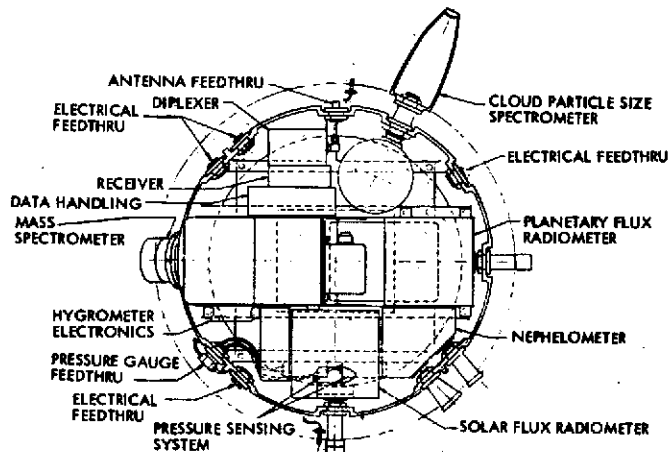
Plan View of Equipment Ring Assembly Showing Instrument Electrical Feedthroughs
